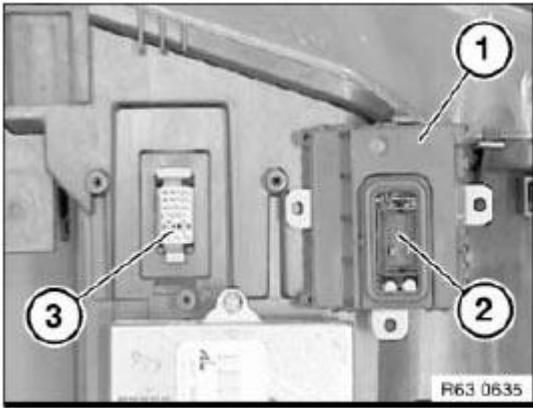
Identifying Adaptive Headlight, Pin Housing And Plug Housing
